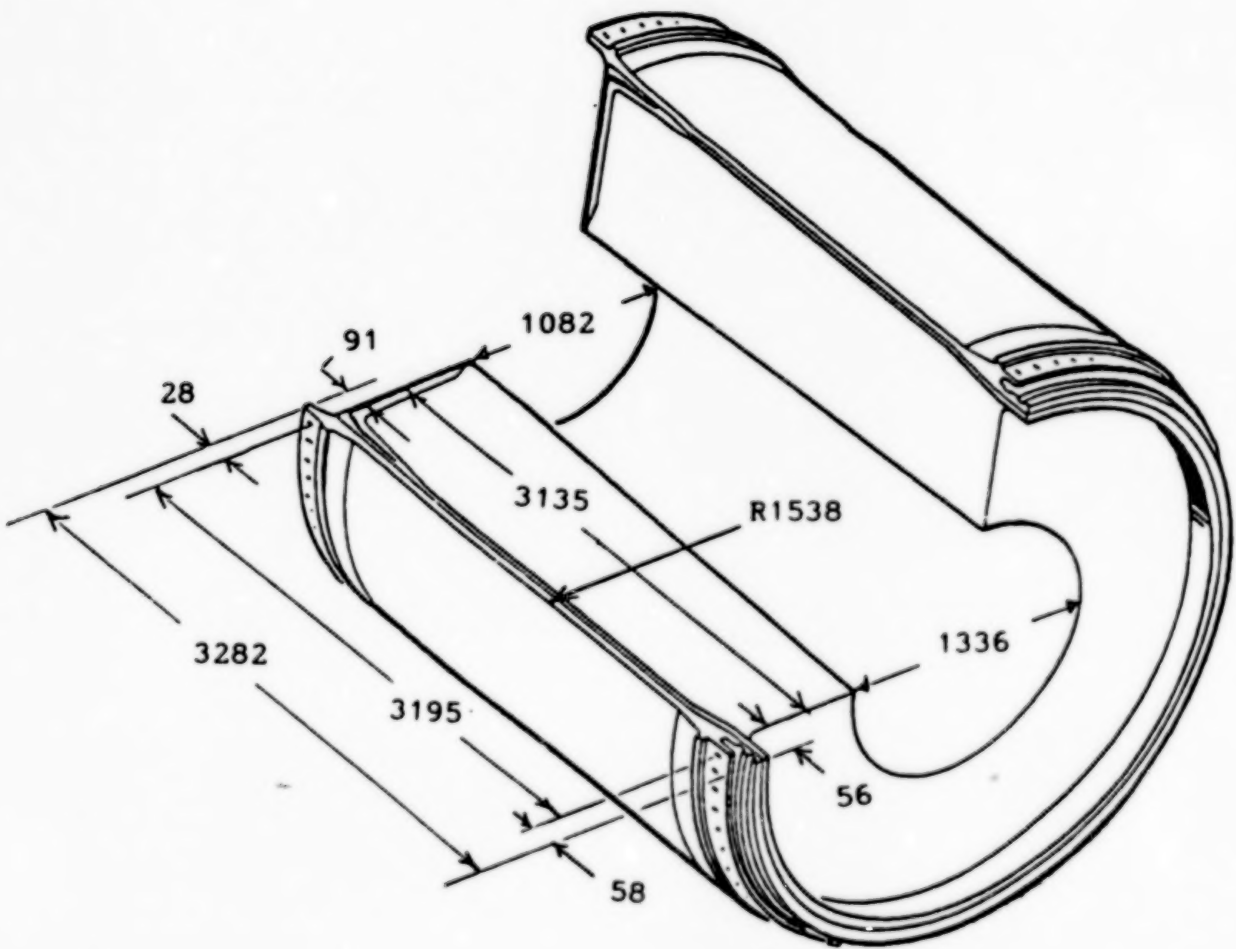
A cutaway view of the Titan 34D SRM segment showing the dimensions.
